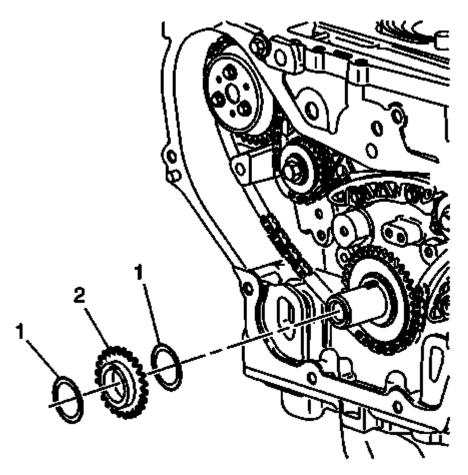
Crankshaft Sprocket Courtesy of GENERAL MOTORS COMPANY
